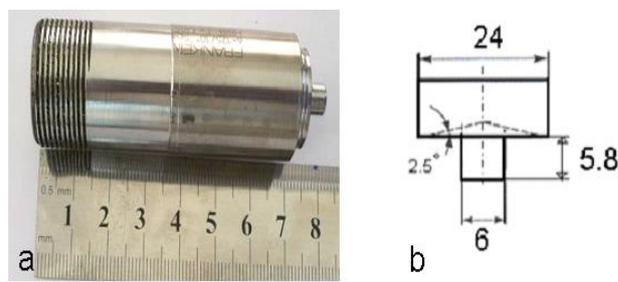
Friction Stir Welding Tool (a) the fabricated tool (b) schematic plot
